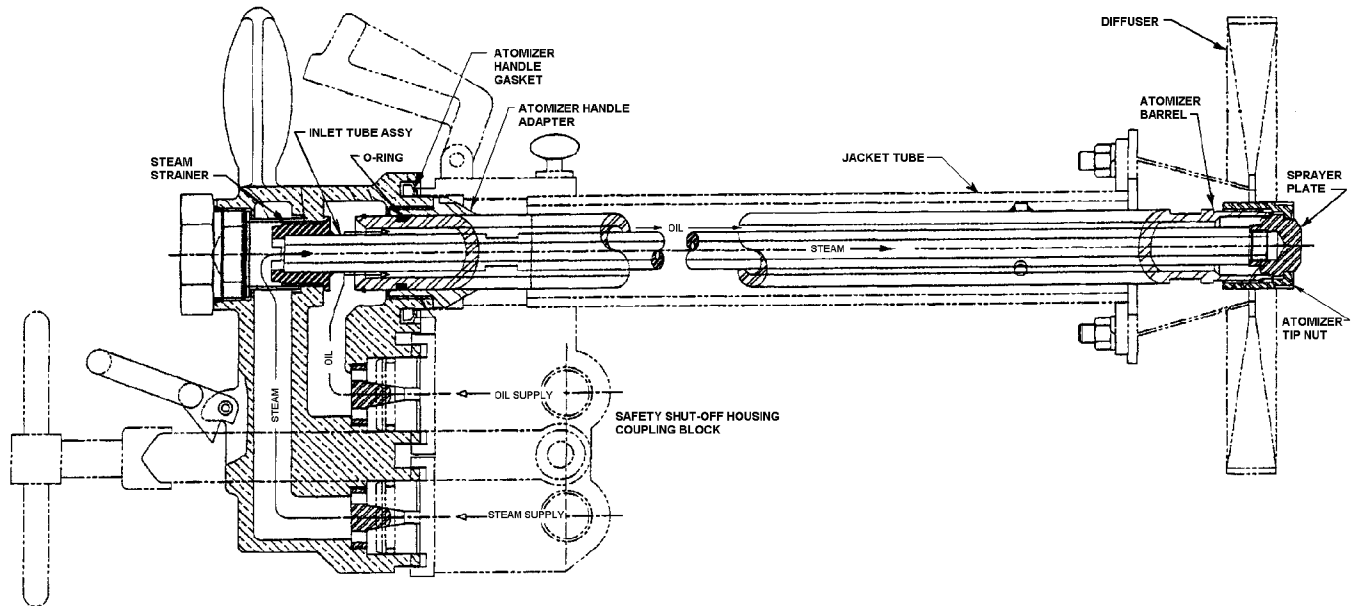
Typical Burner and Steam Atomizer Assembly
